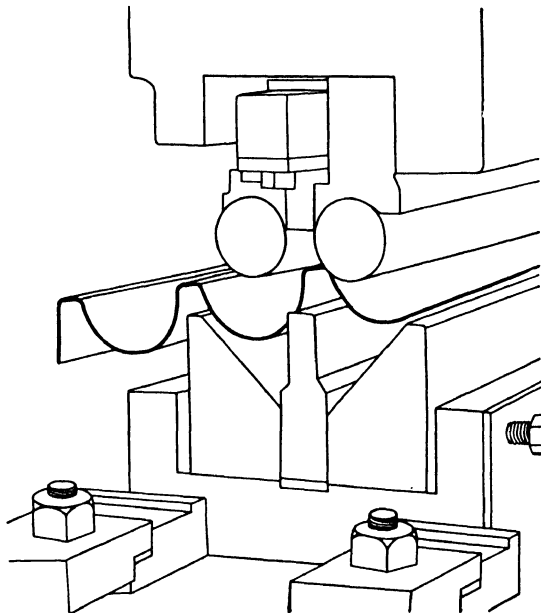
Illustrating the forming of corrugated stiffening sheets on which the smooth outer wing surfaces are riveted on planes made at the Lockheed Aircraft Corporation's plant, Burbank, Calif.
